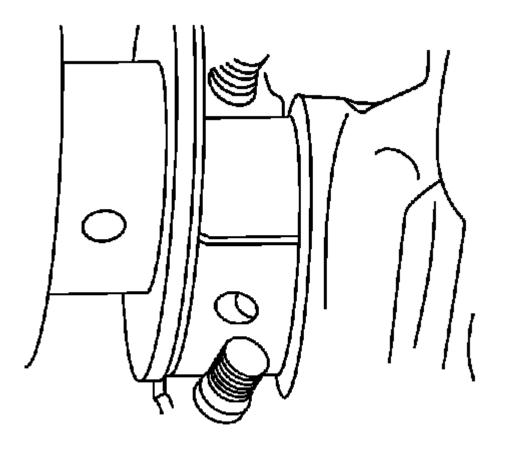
View Of Gaging Plastic Installed On Crankshaft Journal Courtesy of GENERAL MOTORS CORP.
